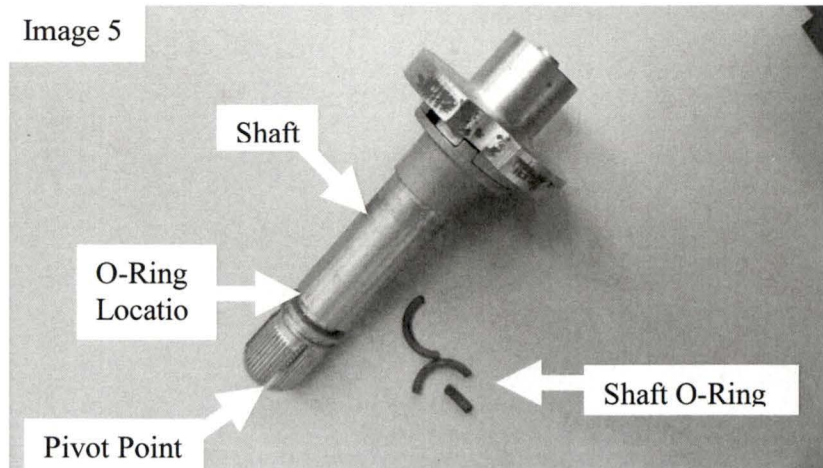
The shaft O-Ring was found intact, but fractured into pieces during removal. The O-ring material was severely hardened and embrittled from environment aging. Using fourier-transform infrared spectroscopy (FRIT) techniques, the O-ring was found to be of Buna-N material (Image 8). The combination of dried lubrication and a hardened O-ring would have contributed to binding forces.
